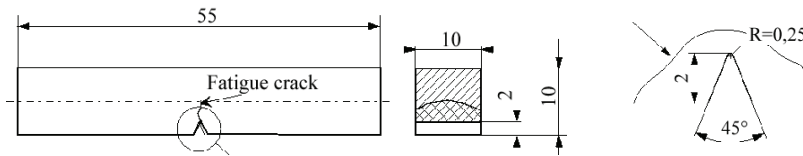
Pre-cracked three-point bend specimen SE (B) applied for impact and J integral testing
